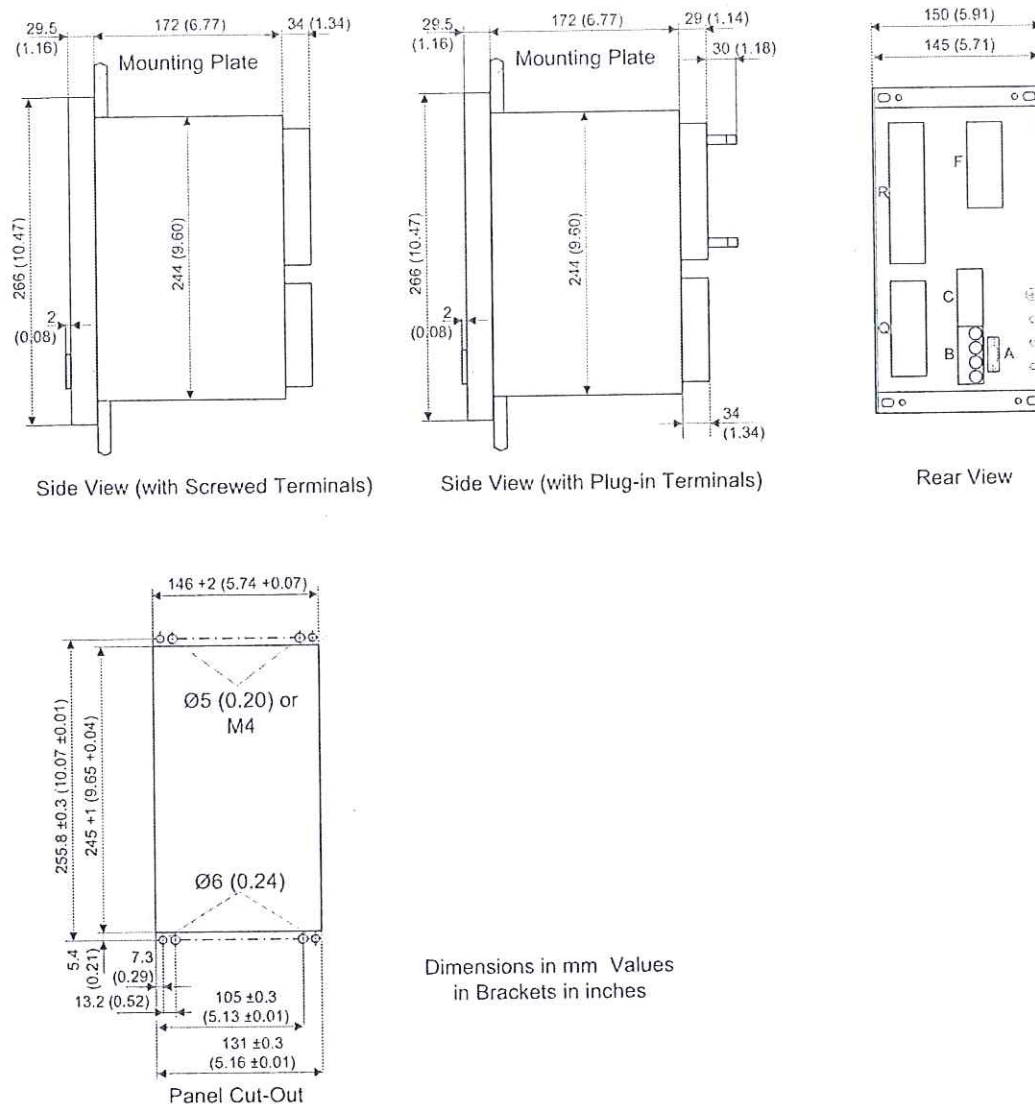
Dimensional drawing of a 7SJ61 for panel flush and cubicle mounting (housing size $\frac{1}{3}$)
